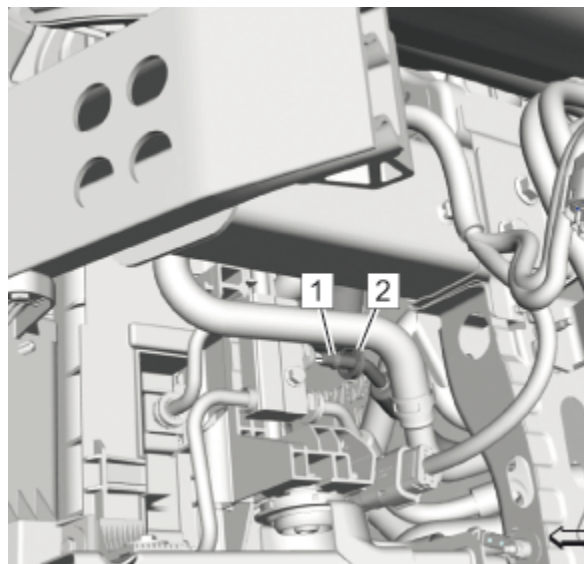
Transmission Fluid Cooler Pipe Connector Cap
